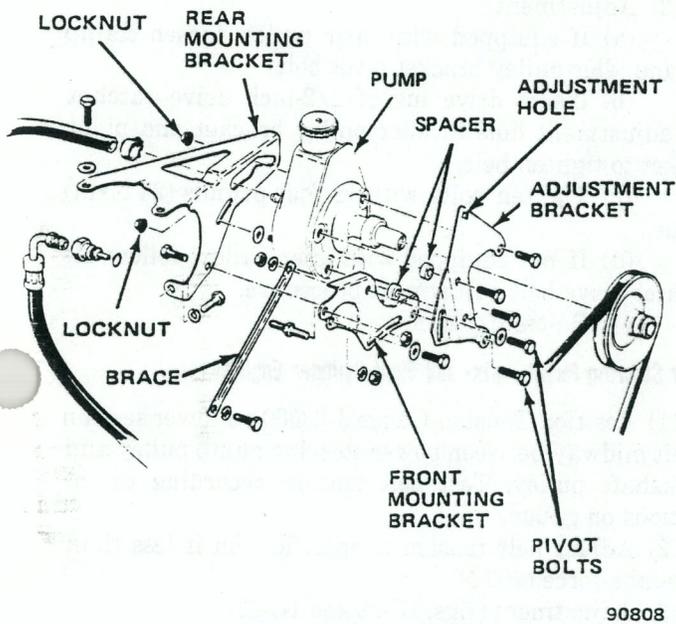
C-18 Four-Cylinder Engine Power Steering Pump Drive Belt Adjustment
